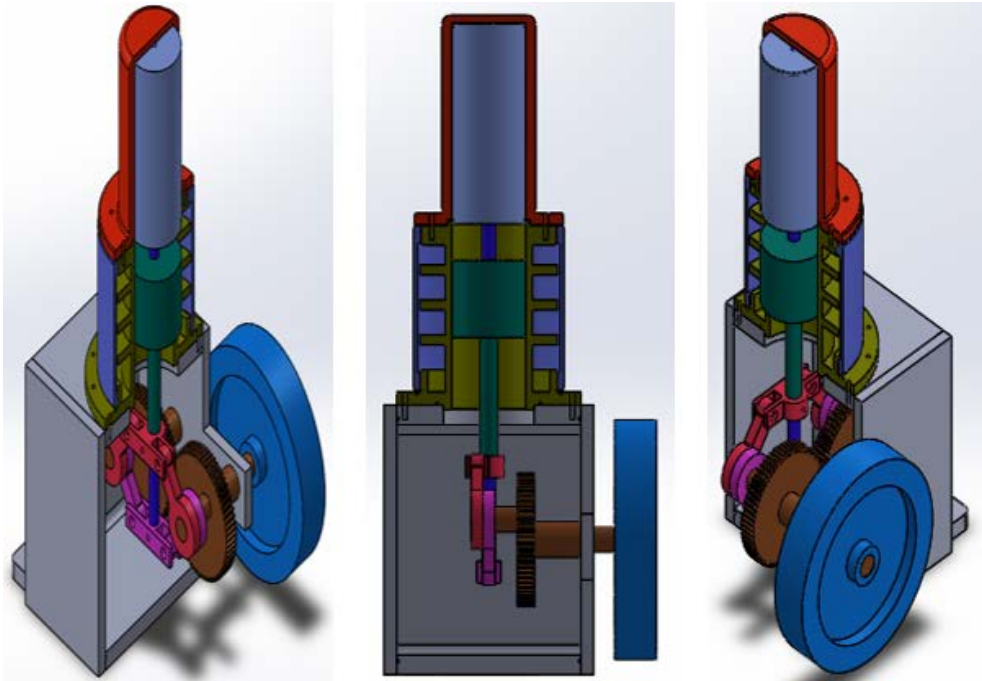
Schematic views in the SolidWorks environment of pre-prototype Stirling engine
